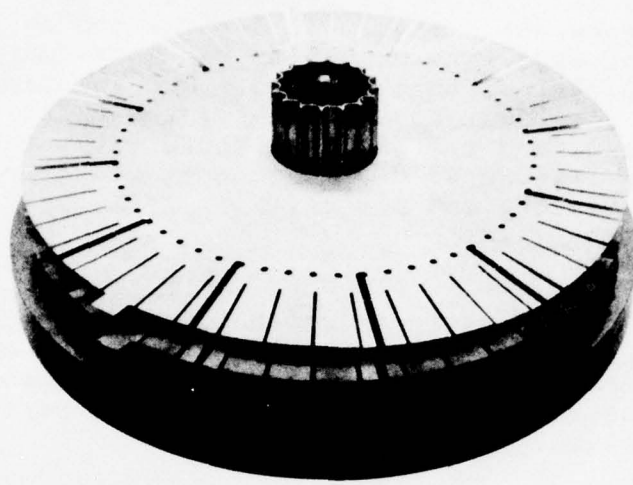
Large Stack Laminates, End Plates, and the Bonding Fixture.
